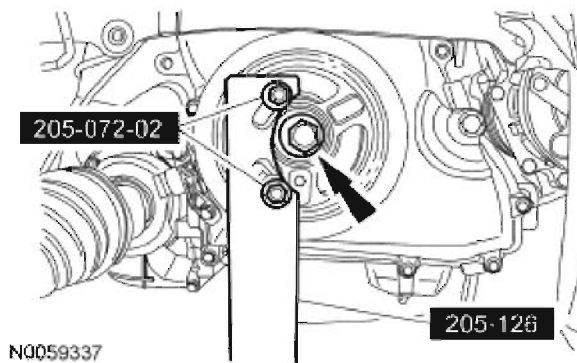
Assembling Special Tools (205-072-02 And 205-126)
